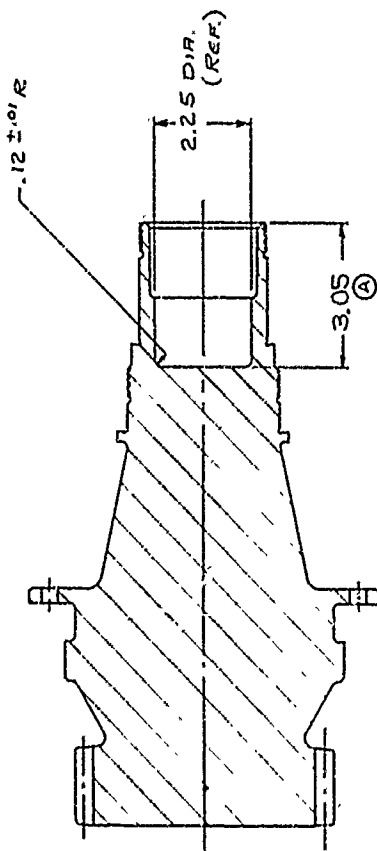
Modified Spiral Bevel Pinion Gear Shaft Mounting Support.
